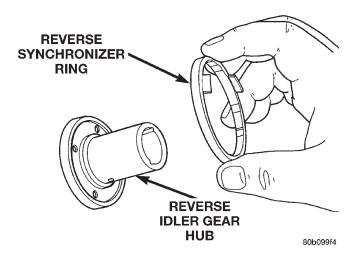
Remove Reverse Idler Gear Synchronizer Ring
